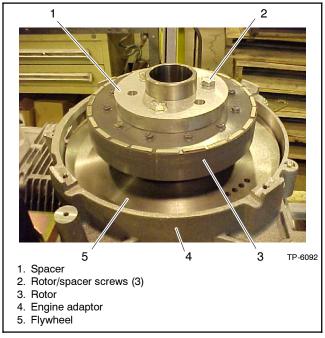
Rotor and Spacer (shroud and stator removed)
